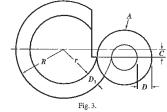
If the difference D_1 between the large and small radii of the tool were made equal to dimension D required on the work, D would be a certain amount oversize, depending upon The offset C of the cutting edge. The following formulas can be used to determine the radii of circular forming tools for turning parts to different diameters: Let R =largest radius of tool in inches; D = difference in radii of steps on work; C =
